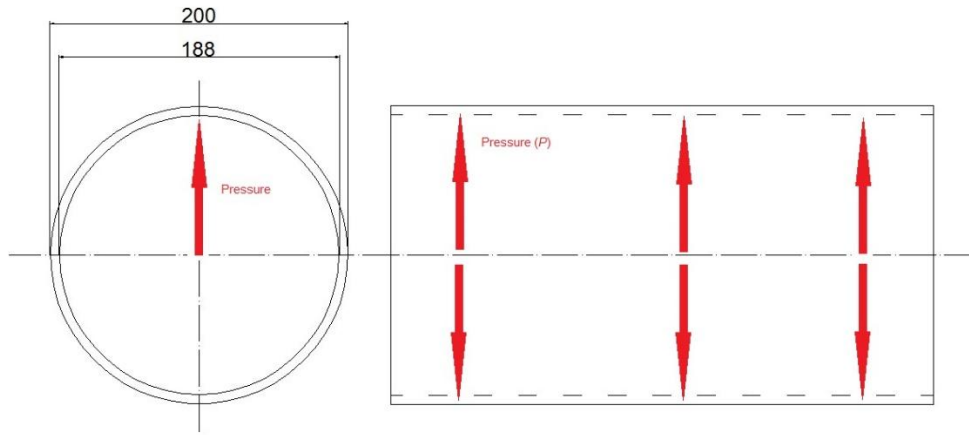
Drawing of the pipe (dimensions are in *mm*)
